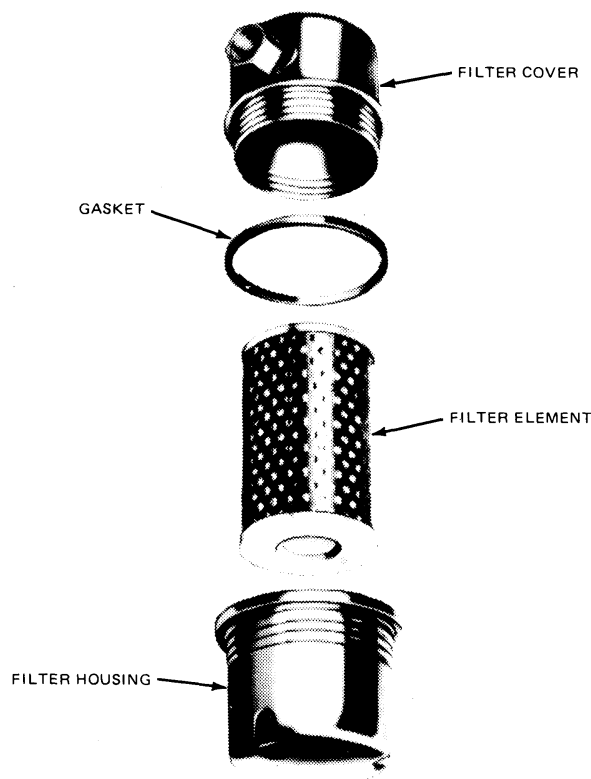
Typical In-Line Fuel Filter—600-800 Series With Electric Fuel Pump
